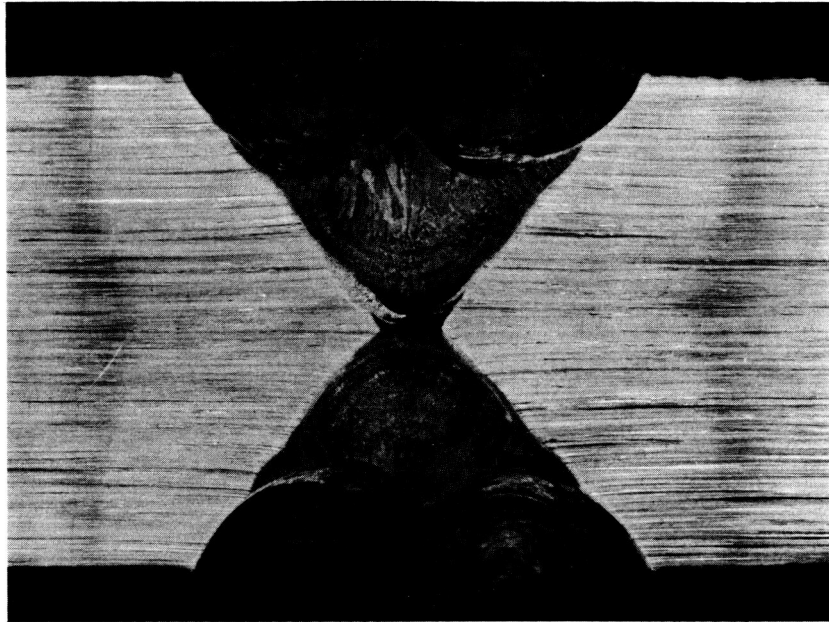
TYPICAL CROSS-SECTION AND JOINT PREPARATION FOR 1.00-INCH MIG WELDMENTS
